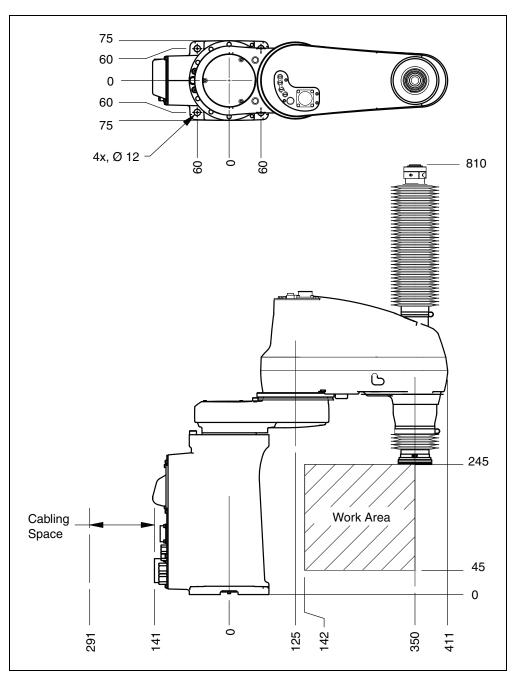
Cobra 350 CR/ESD Top and Side Dimensions
